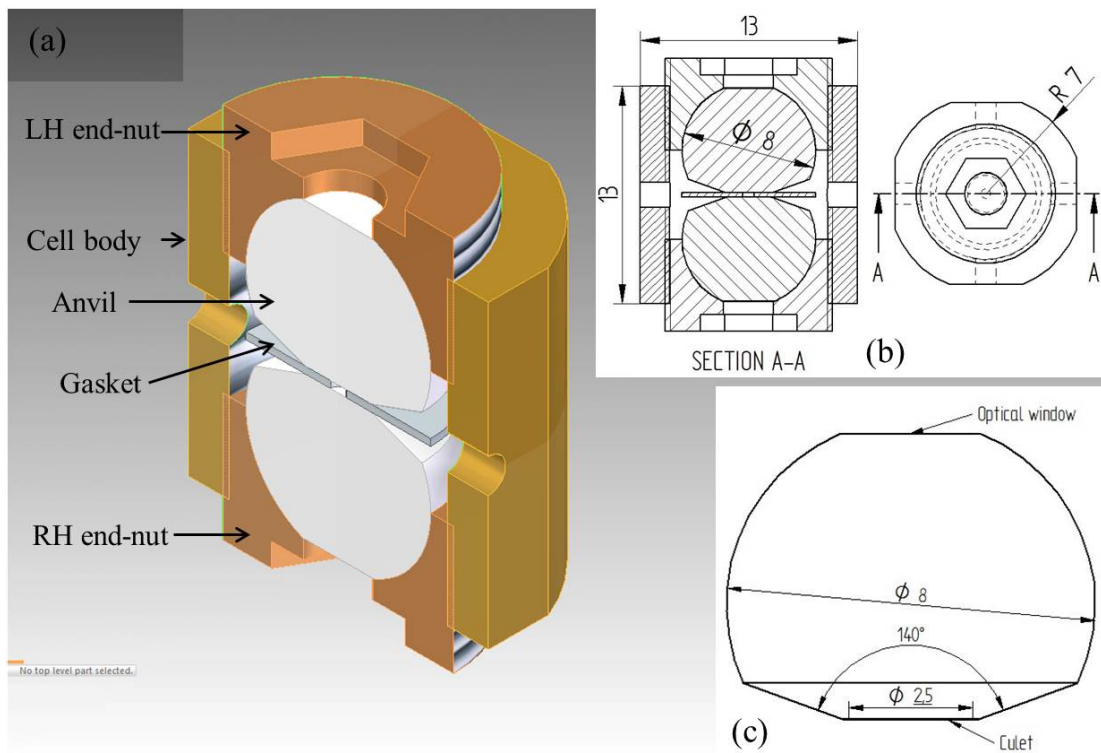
(a) Section view of the second design concept of T-SAC; (b) CAD drawing with key dimensions; (c) The dimension of the spherical anvil.
